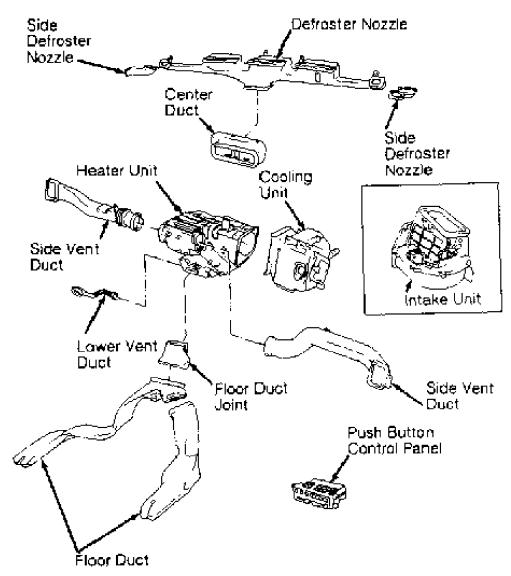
Exploded View of A/C-Heater Components & Ducts (Typical) Courtesy of Nissan Motor Co., U.S.A.
